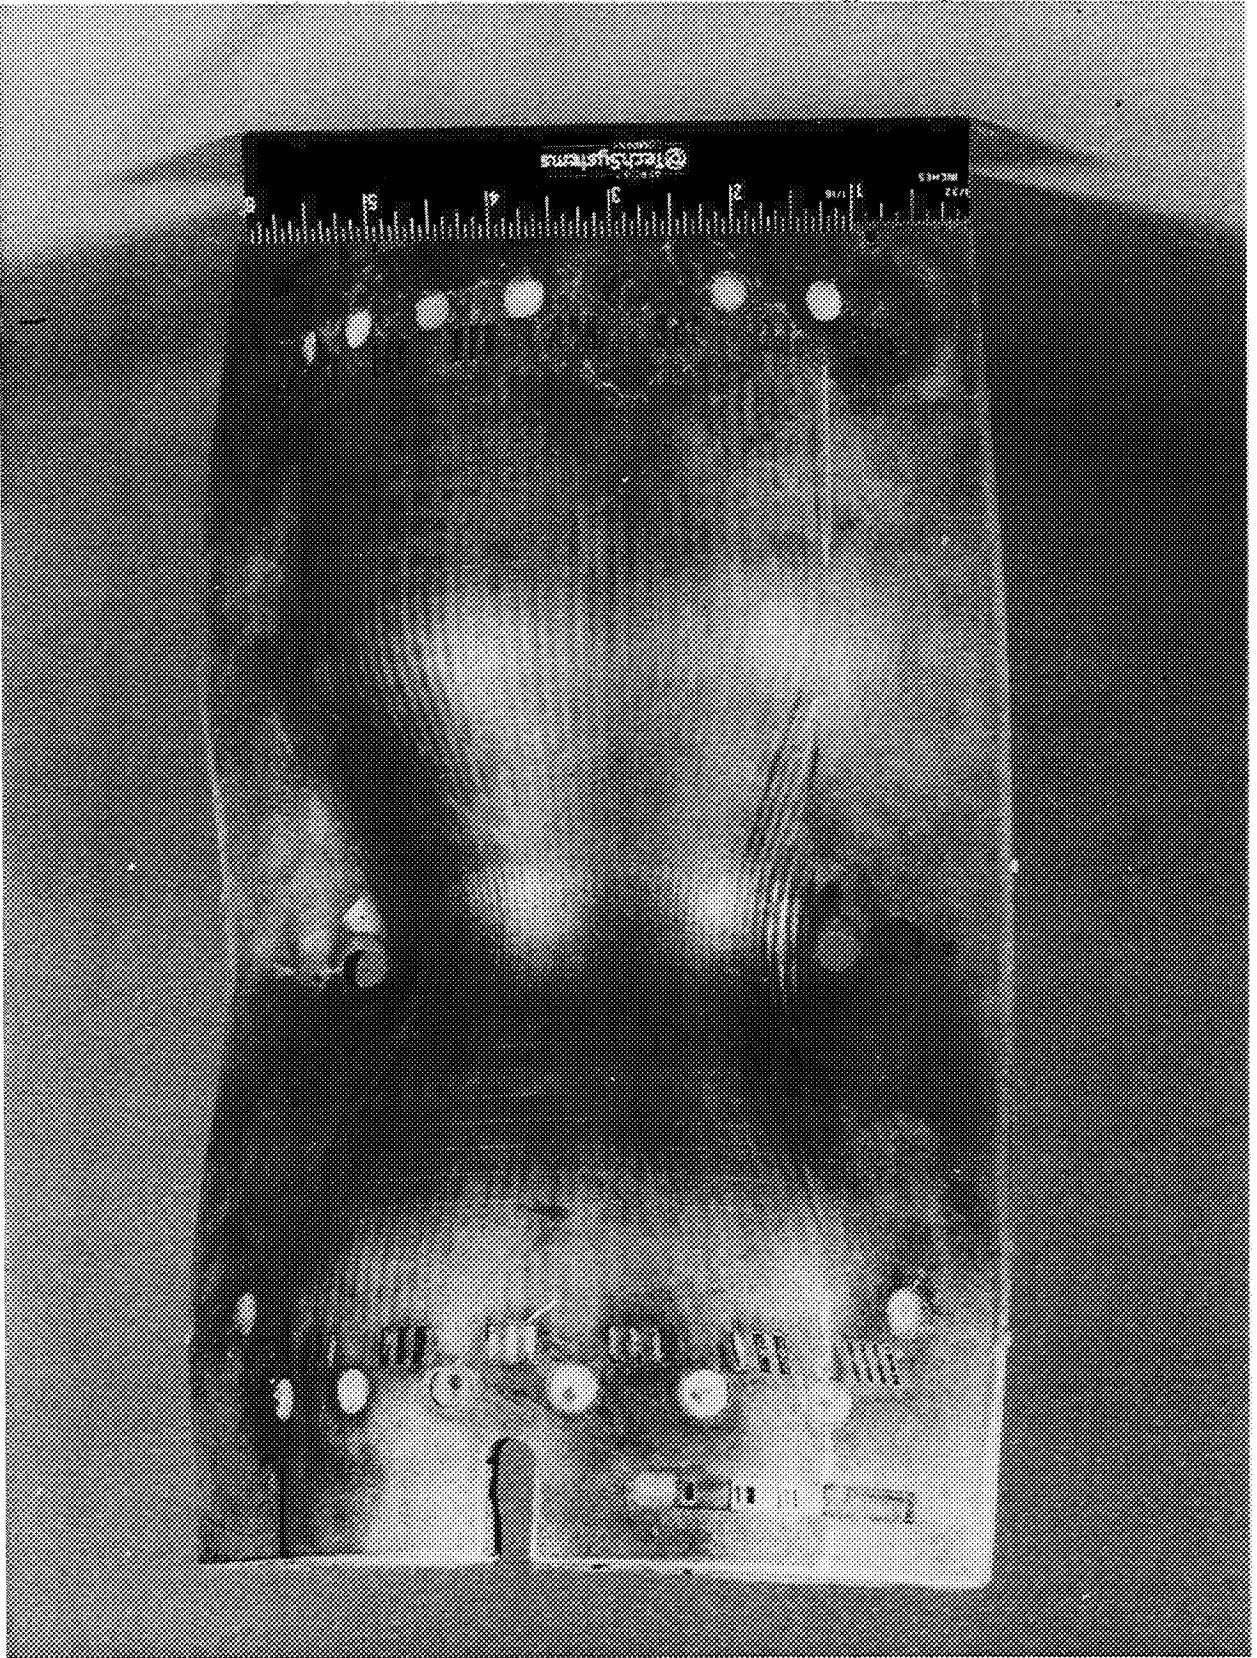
Parts Formed in a Single Operation Remained Intact
